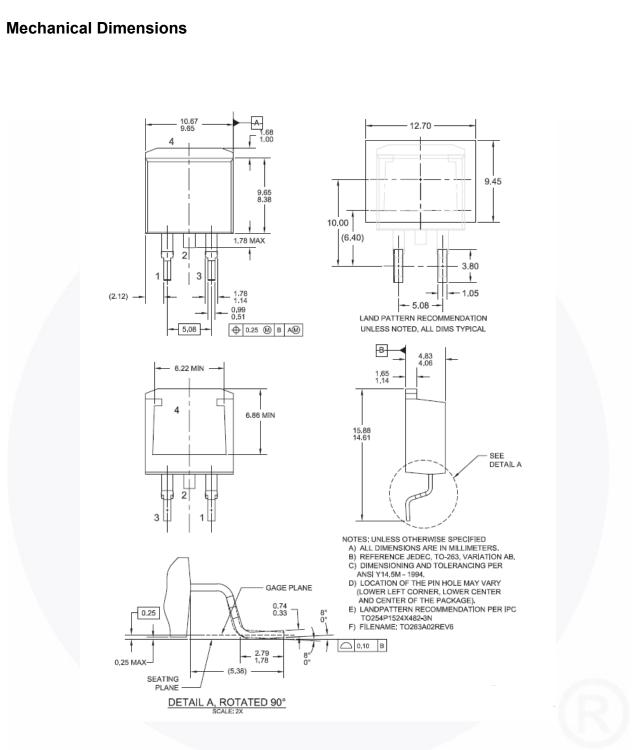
TO263 (D²PAK), Molded, 2-Lead, Surface Mount
